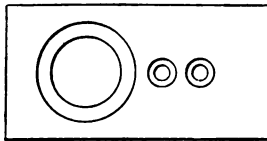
Cast Iron Body Die, used with Tool Steel Bushings
